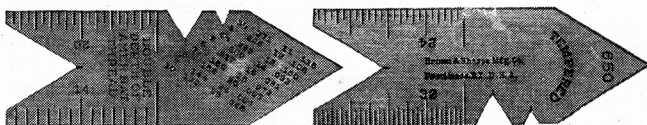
Back and front sides (left to right) of center gage for testing the angle of a lathe center point.
